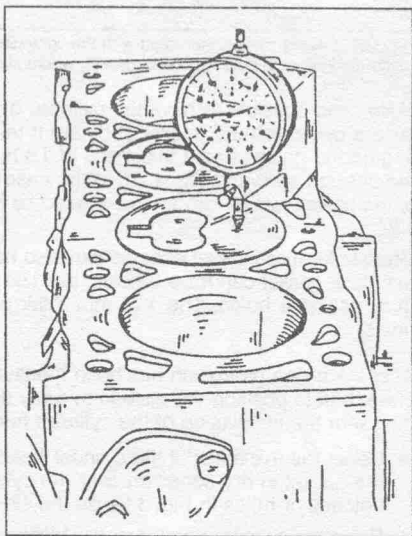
Measuring the protrusion of the pistons above the cylinder block face. The stylus is placed onto the piston face, as far as possible near the centre of the piston crown.
